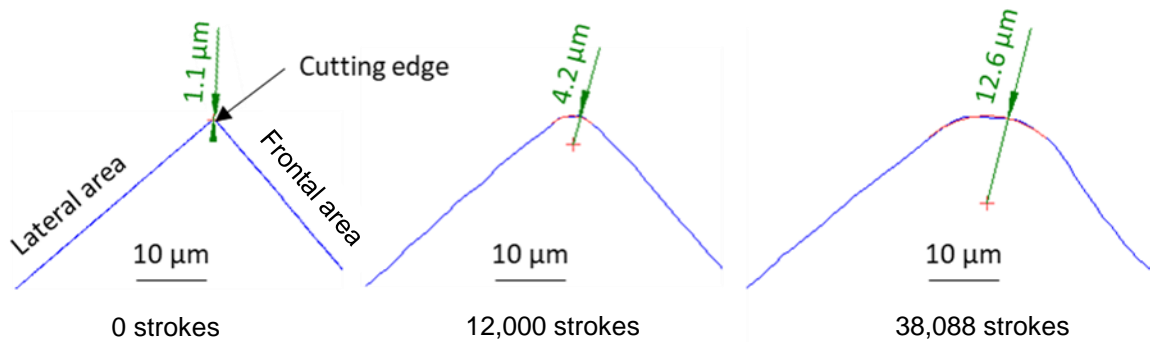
Left: sharp-edged cutting edge; center: tool wear after 12,000 strokes; right: tool wear after 38,088 strokes
